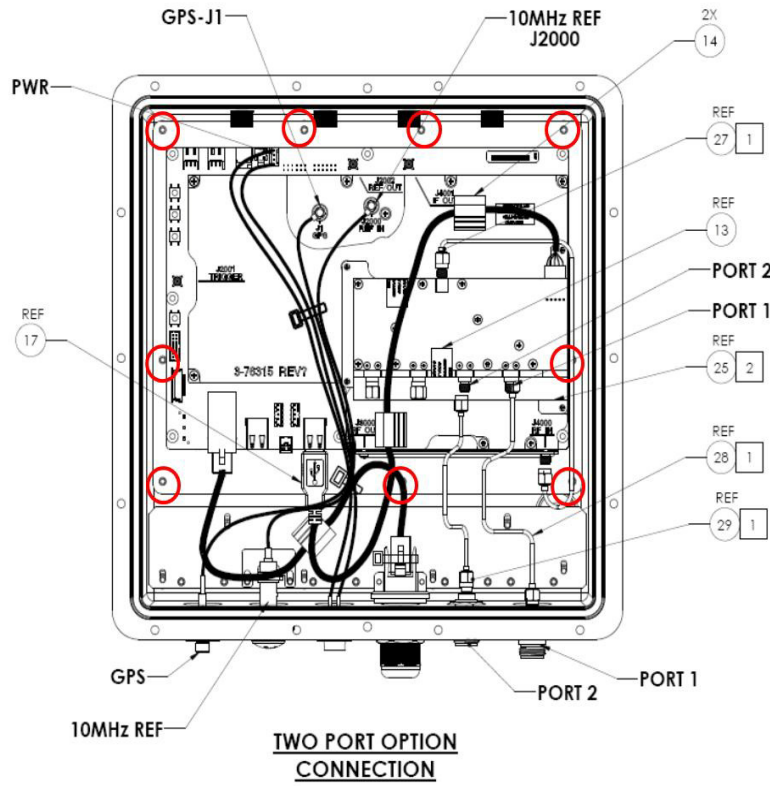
Removing the 9 Screws Connecting PCB Assemblies to the Case
